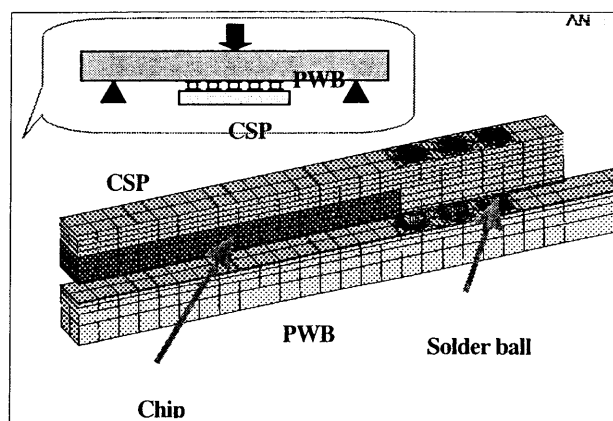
3point bending test for Chip Size Package mounted on PWB by Pb free solder.
